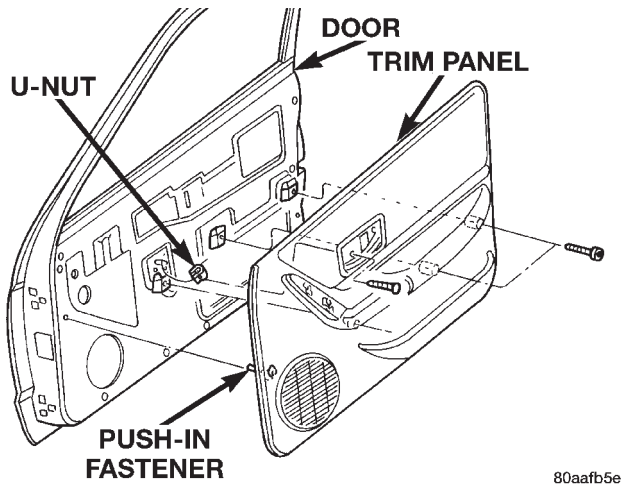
Front Door Trim Panel Remove/Install - Power Window
